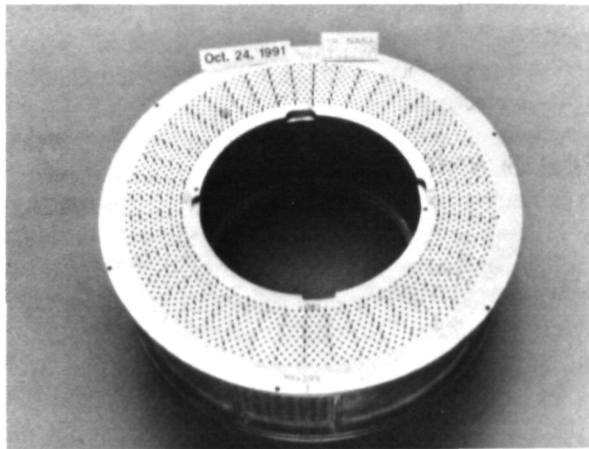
SPRE Cooler with 1/6 Tubes Blocked
